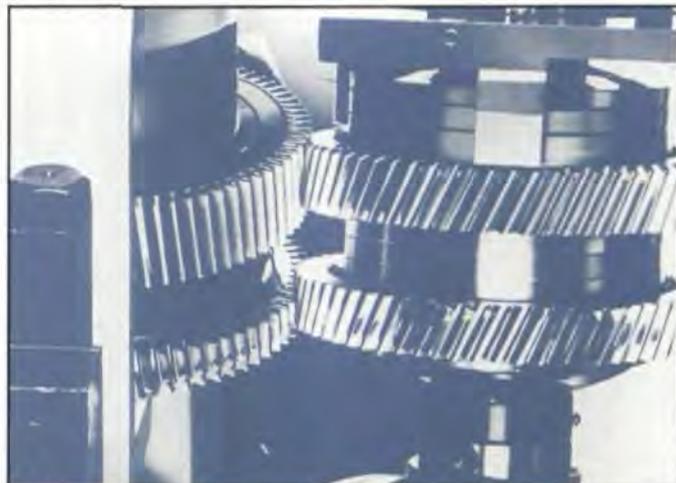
Mechanically constrained mesh of a CBN-coated tool with a crossed helical gearing.
